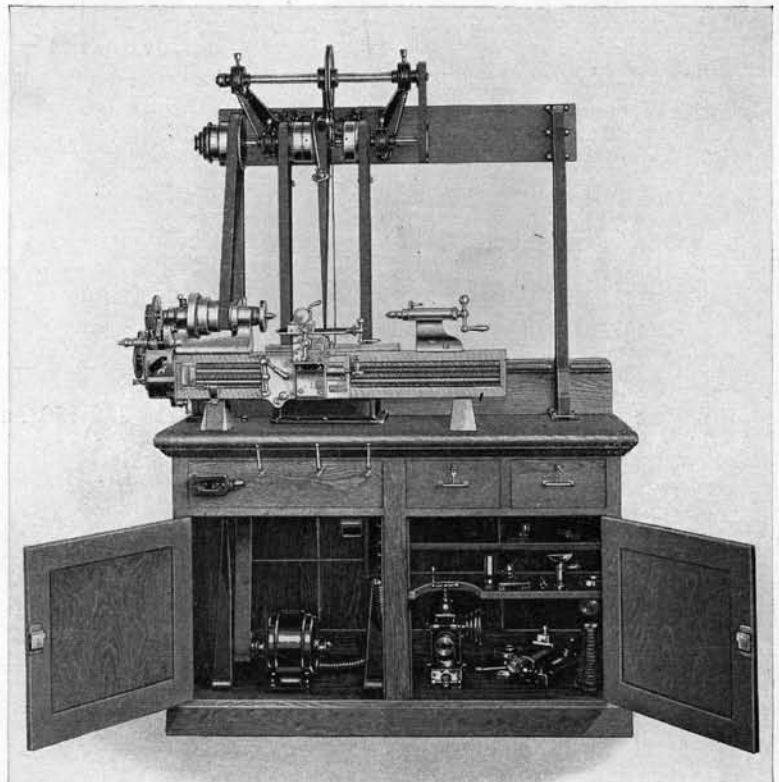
a. Lathe mounted on Unit Bench, arranged for Individual Motor Drive.
